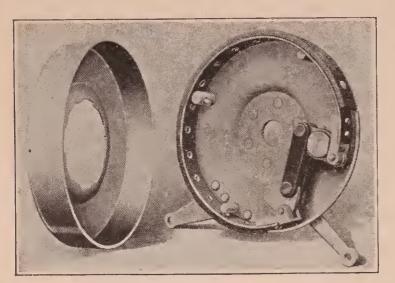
Typical Expanding-Band Brake Courtesy of Harley-Davidson Motor Company, Milwaukee, Wisconsin
